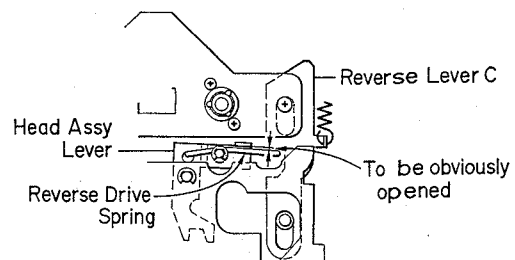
Reverse Solenoid Positioning Adjustment (2)
